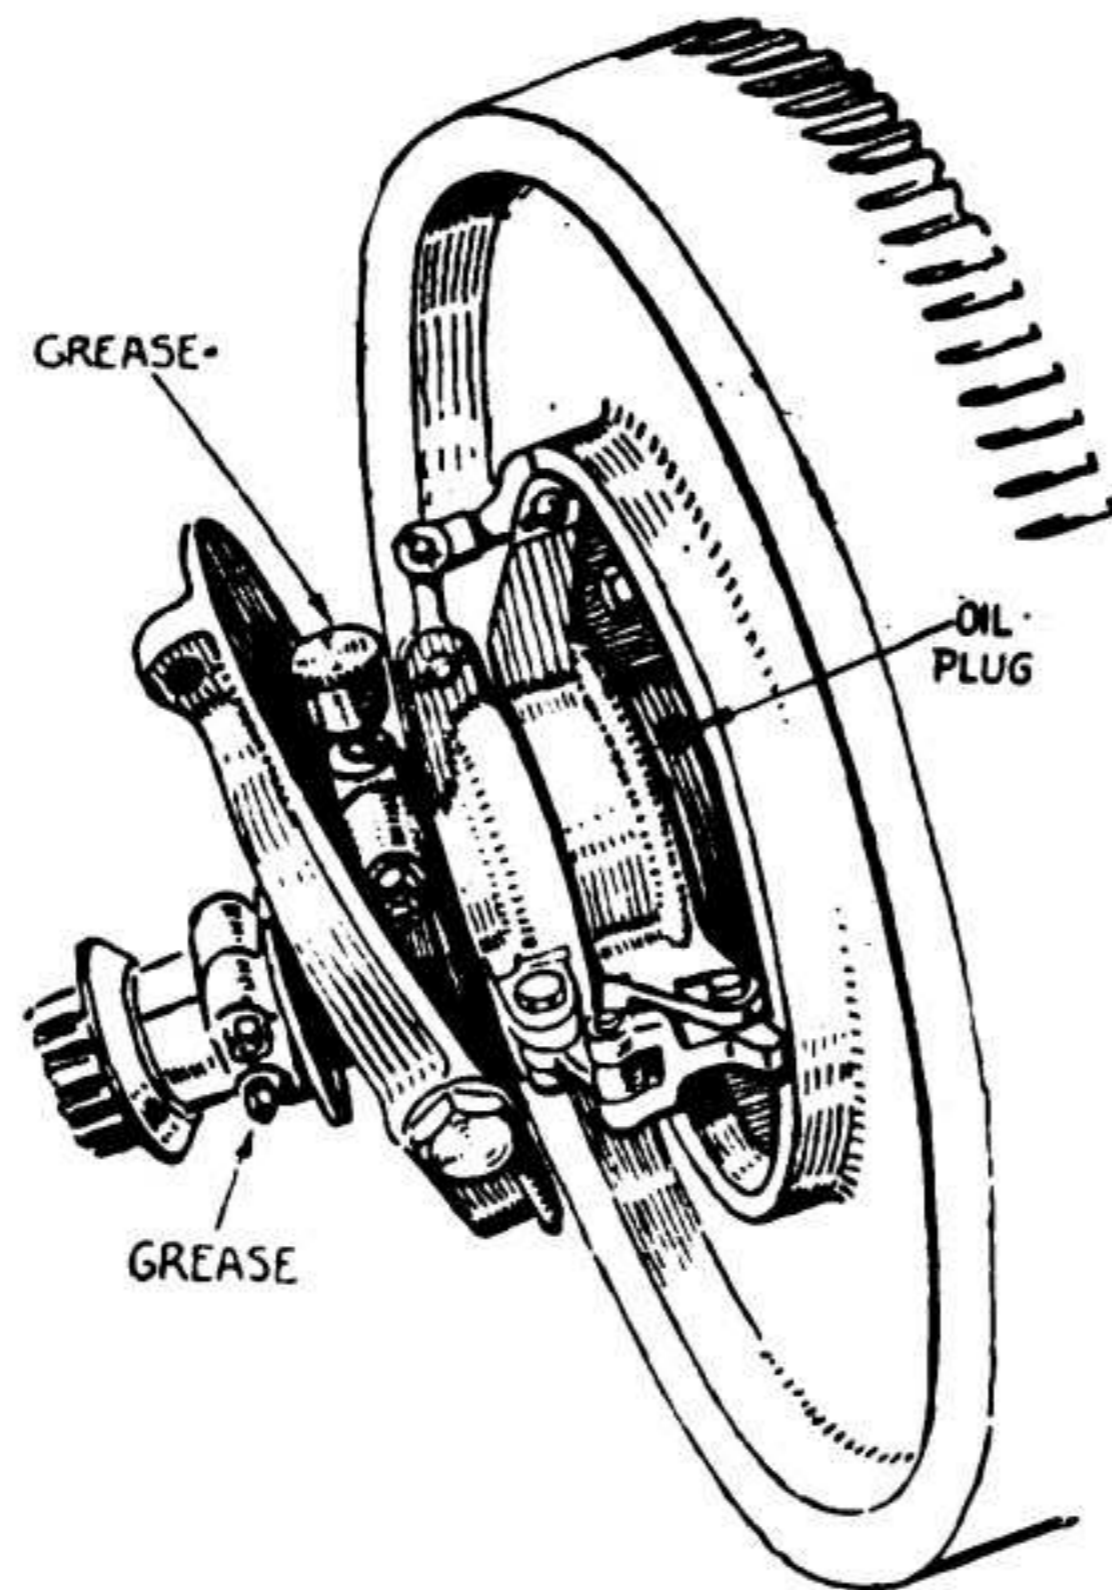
MASTER CLUTCH AND SHIFTER YOKE
